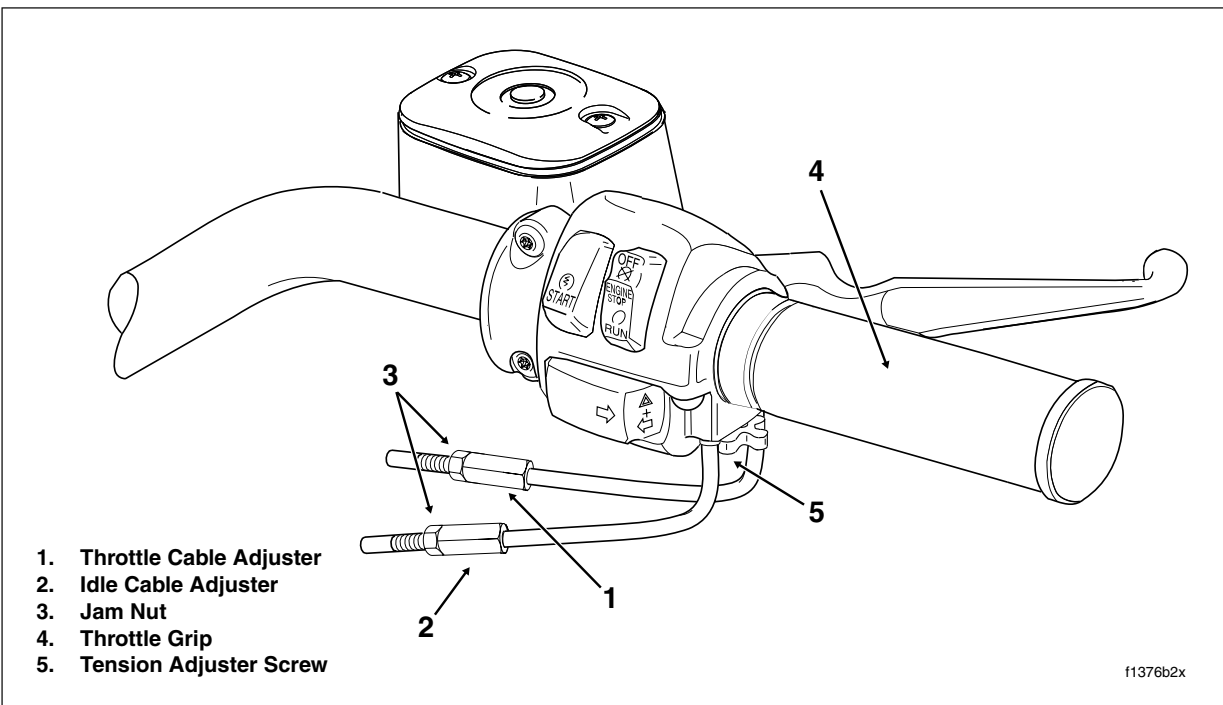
Throttle Cable Assembly - Throttle Side (FLHR/S)
